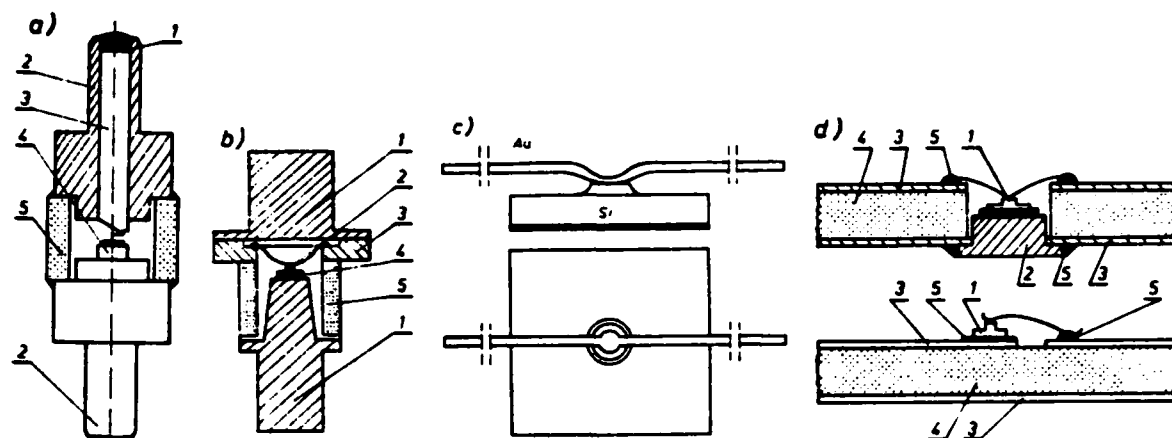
Design examples of microwave diodes: a) a design of a diode with a linked contact (1--solder, 2--electrodes, 3--linking electrode, 4--structure, 5--ceramics); b) the structure of a diode with a welded contact (1--electrodes, 2--Au wire, 3--collar, 4--structure, 5--ceramics); c) the structure of a diode with intended for scaled microwave systems; d) examples of the structure's situating in a striped line (1--structure, 2--metal support, 3--metal track, 4--insulator, 5--connection through the weld by conducting paste)
